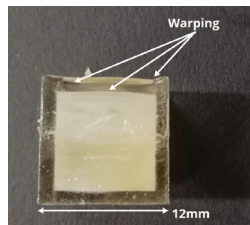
no sagging is visible on surfaces printed on fluid. However warping is visible on the exterior edges of the part (not in contact with fluid)
